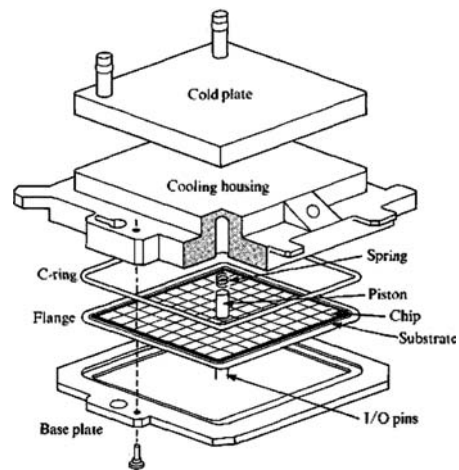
Oblique-view photograph of the TCM assembly utilized in IBM 3081 processors, with a cut-out section to make some pistons and mounted chips visible (after Ref. [24])
